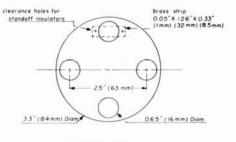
Plate connector and bypass disk. Each tube hole has Instrument Specialty Company 97-70 finger stock soldered on the inside. The Teflon sheet is also cut to the same dimensions.
